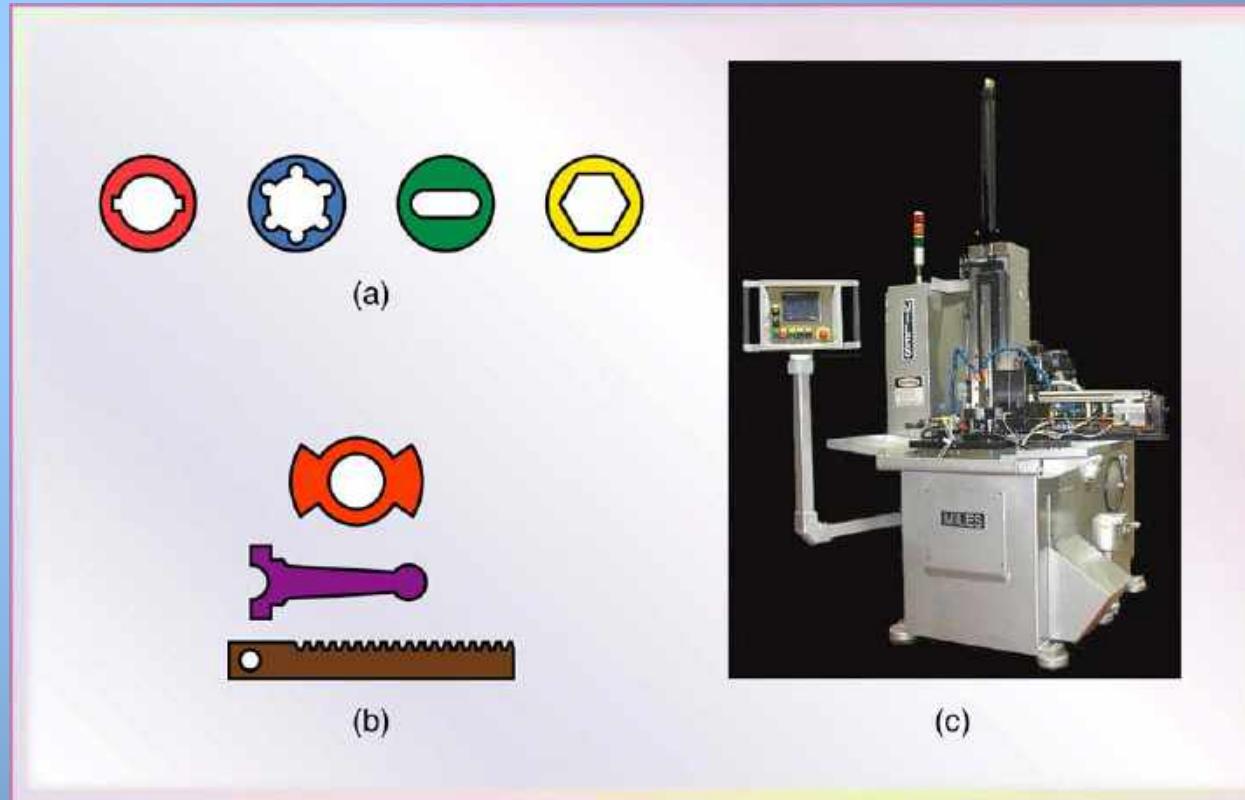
(a) Typical parts made by internal broaching. (b) Parts made by surface broaching. Heavy lines indicate broached surfaces. (c) Vertical broaching machine. *Source:* (a) and (b) Courtesy of General Broach and Engineering Company. (c) Courtesy of Ty Miles, Inc.
